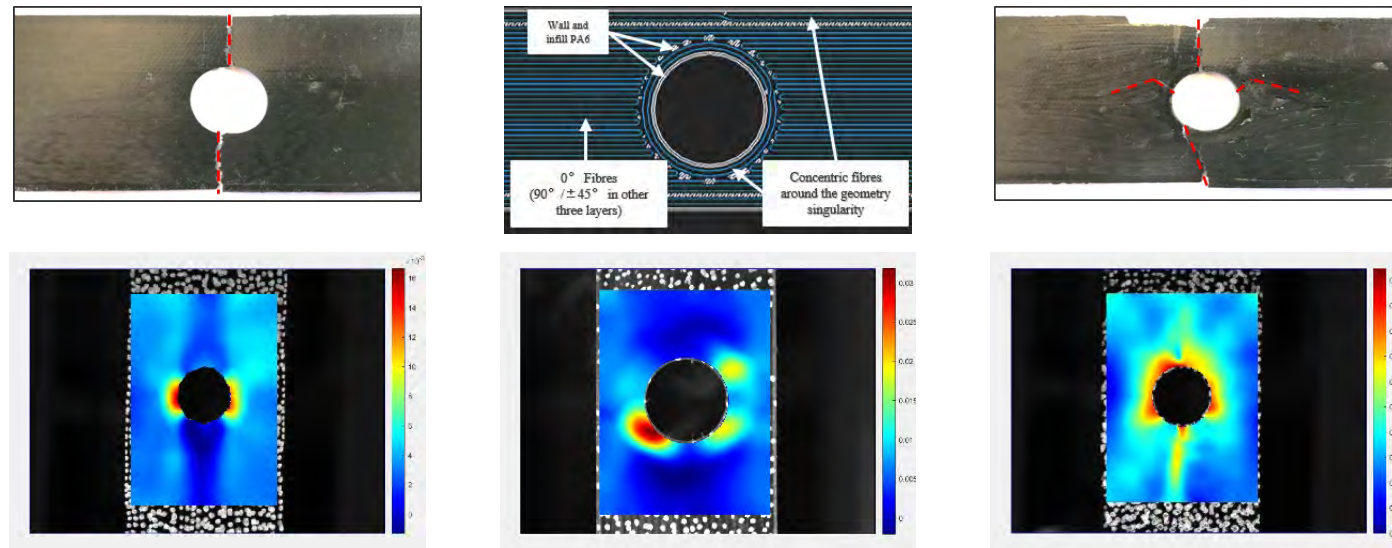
Uniaxial tensile test of printed hole-in-plate composites [failure path & DIC imaging]
